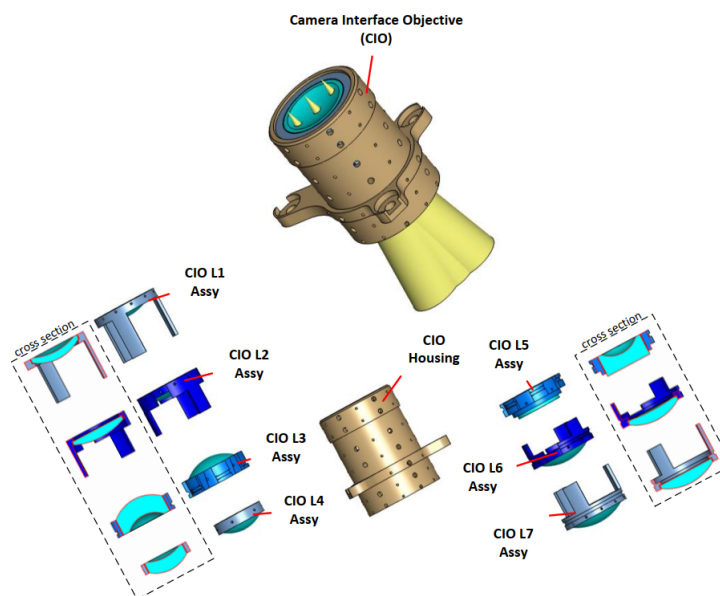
Exploded schematic view of the CIO opto-mechanical parts.
